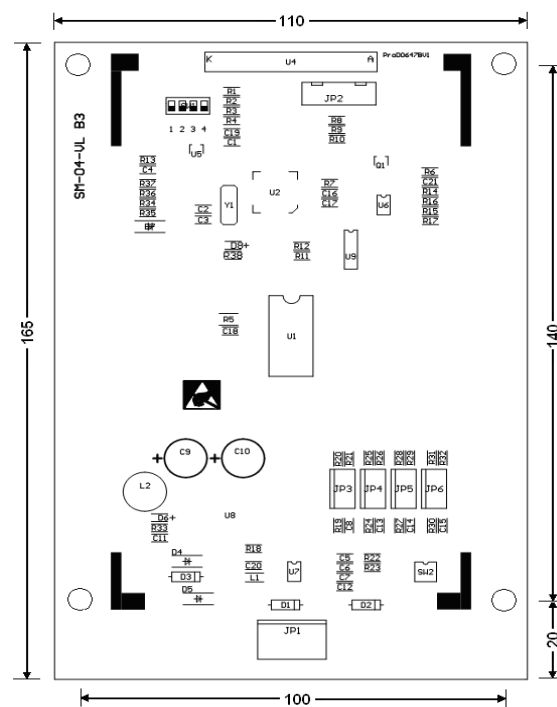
Mounting Dimensions of SM-04-VL/B
